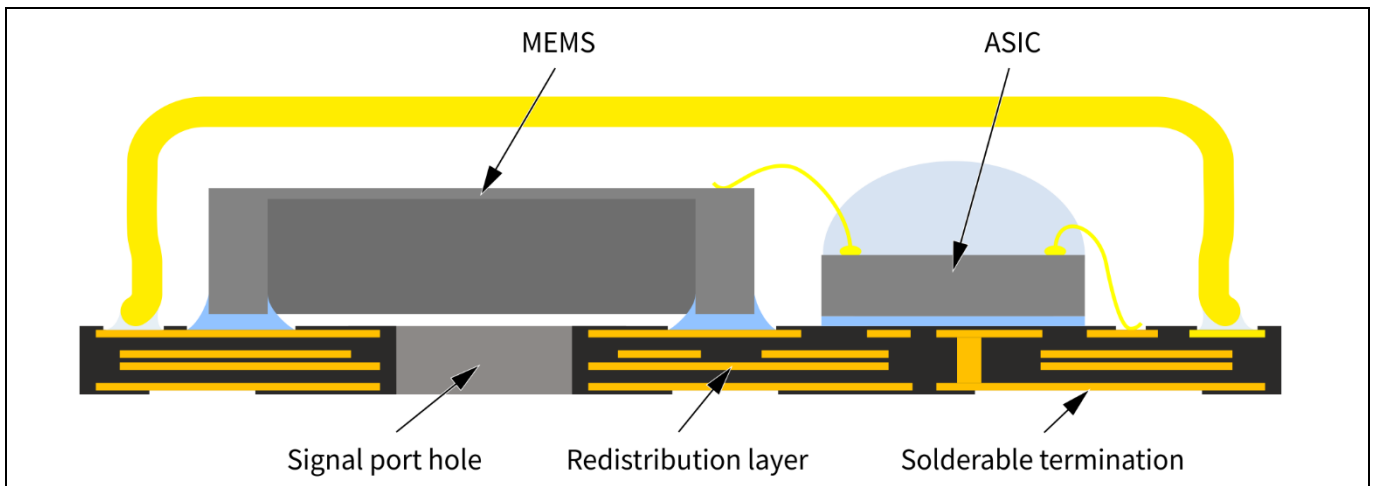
Schematic showing the inner setup of a sensor package with signal port hole in the package landing area.
